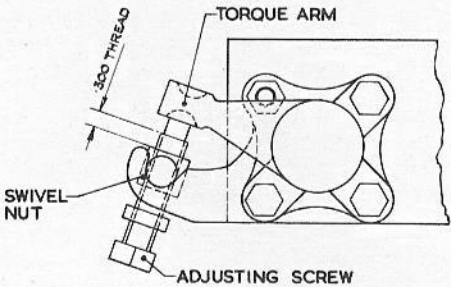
INITIAL SETTING OF ADJUSTING SCREW.
